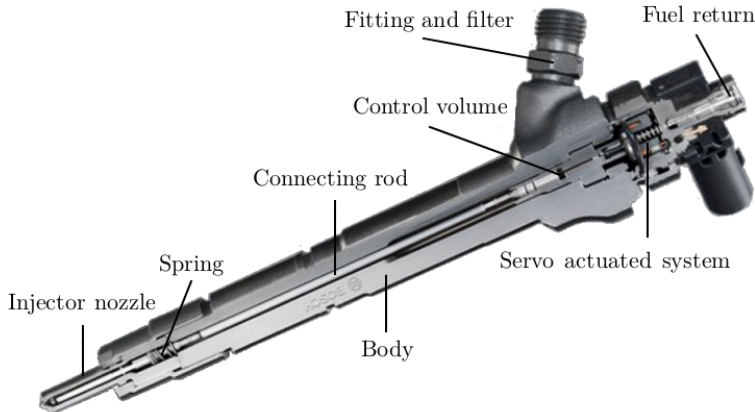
Main components of a solenoid driven injector. Image of a Bosch CRI2-20 injector.
